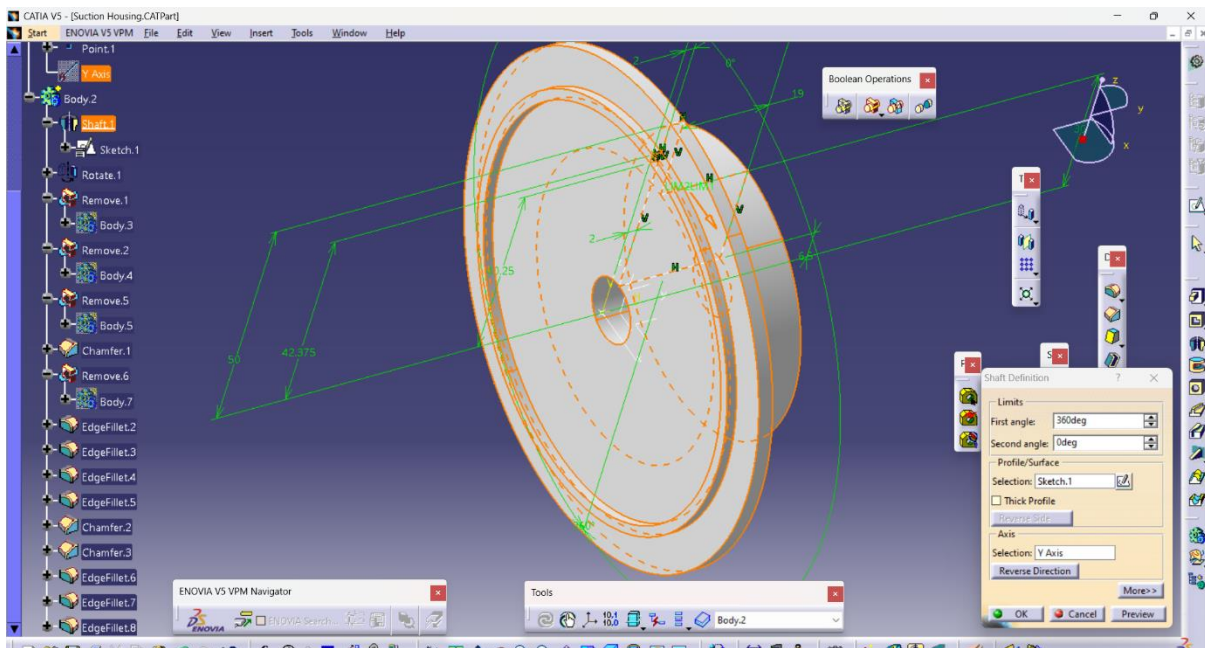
Creating a 3D solid body using "Shaft" command of Sketch1
